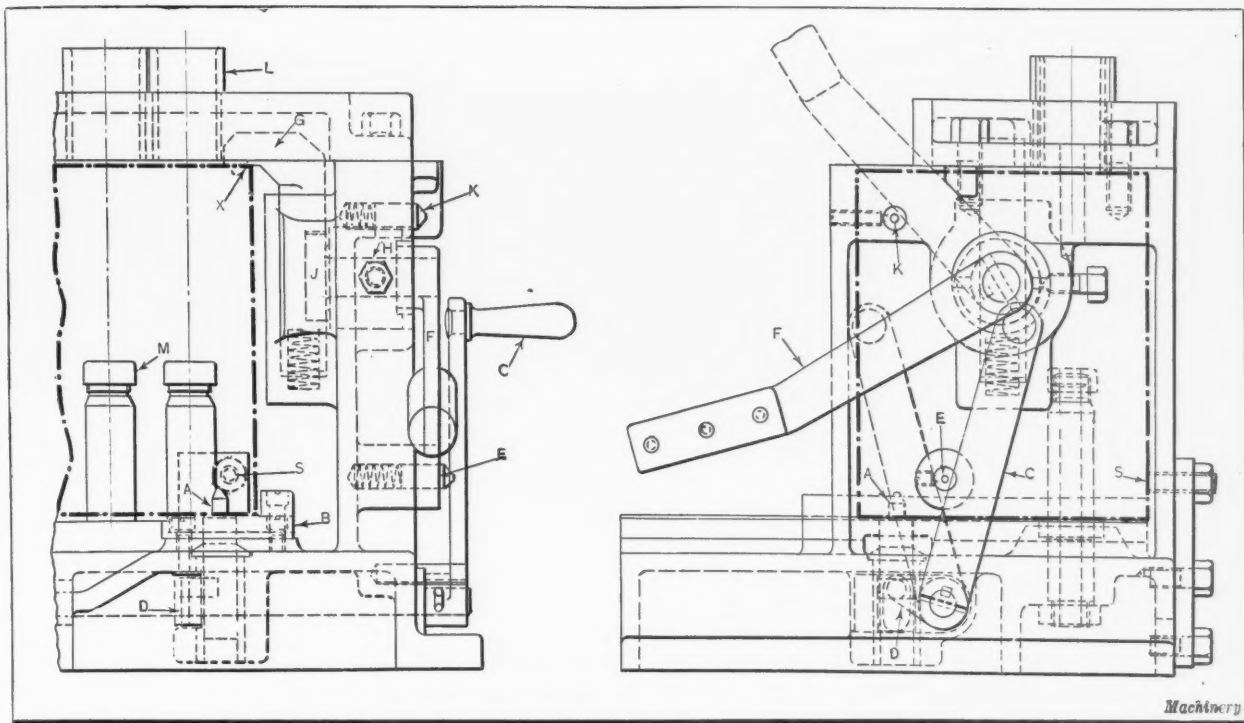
Details of Construction of the Jig shown in Fig. 7
